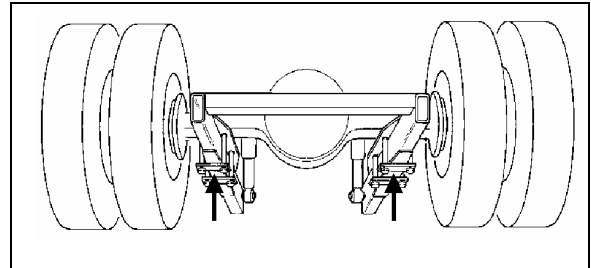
JACKING POINTS ON DRIVE AXLE
